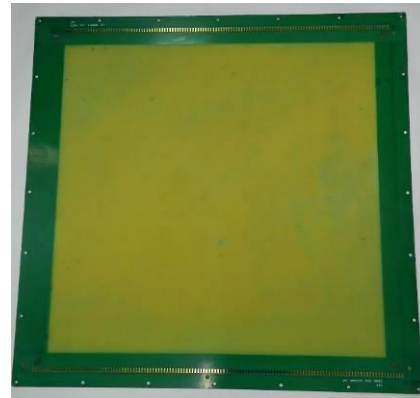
PCB 720 x 720 mm for anode grid with gold plated pads for precise wire alignment
